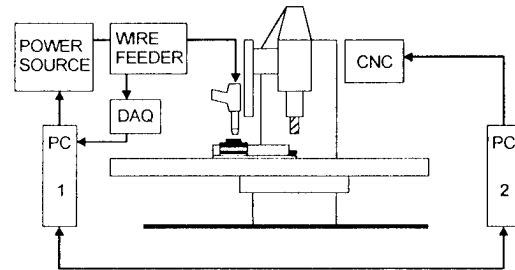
2½ axis CNC hybrid rapid prototyping machine
